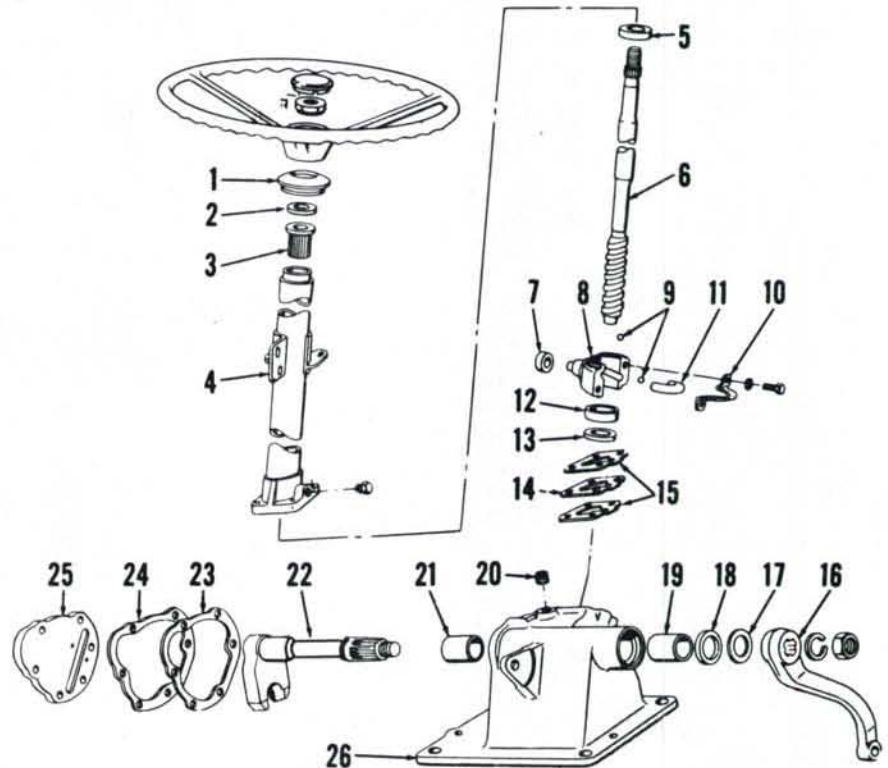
Exploded view of single drop arm manual steering gear unit. Thirty-four 3/8 inch (.52 mm) diameter steel balls are used in the assembly; twenty are used for steering shaft bearings and 14 are used in ball nut (8) and tube (11) recirculating groove.
